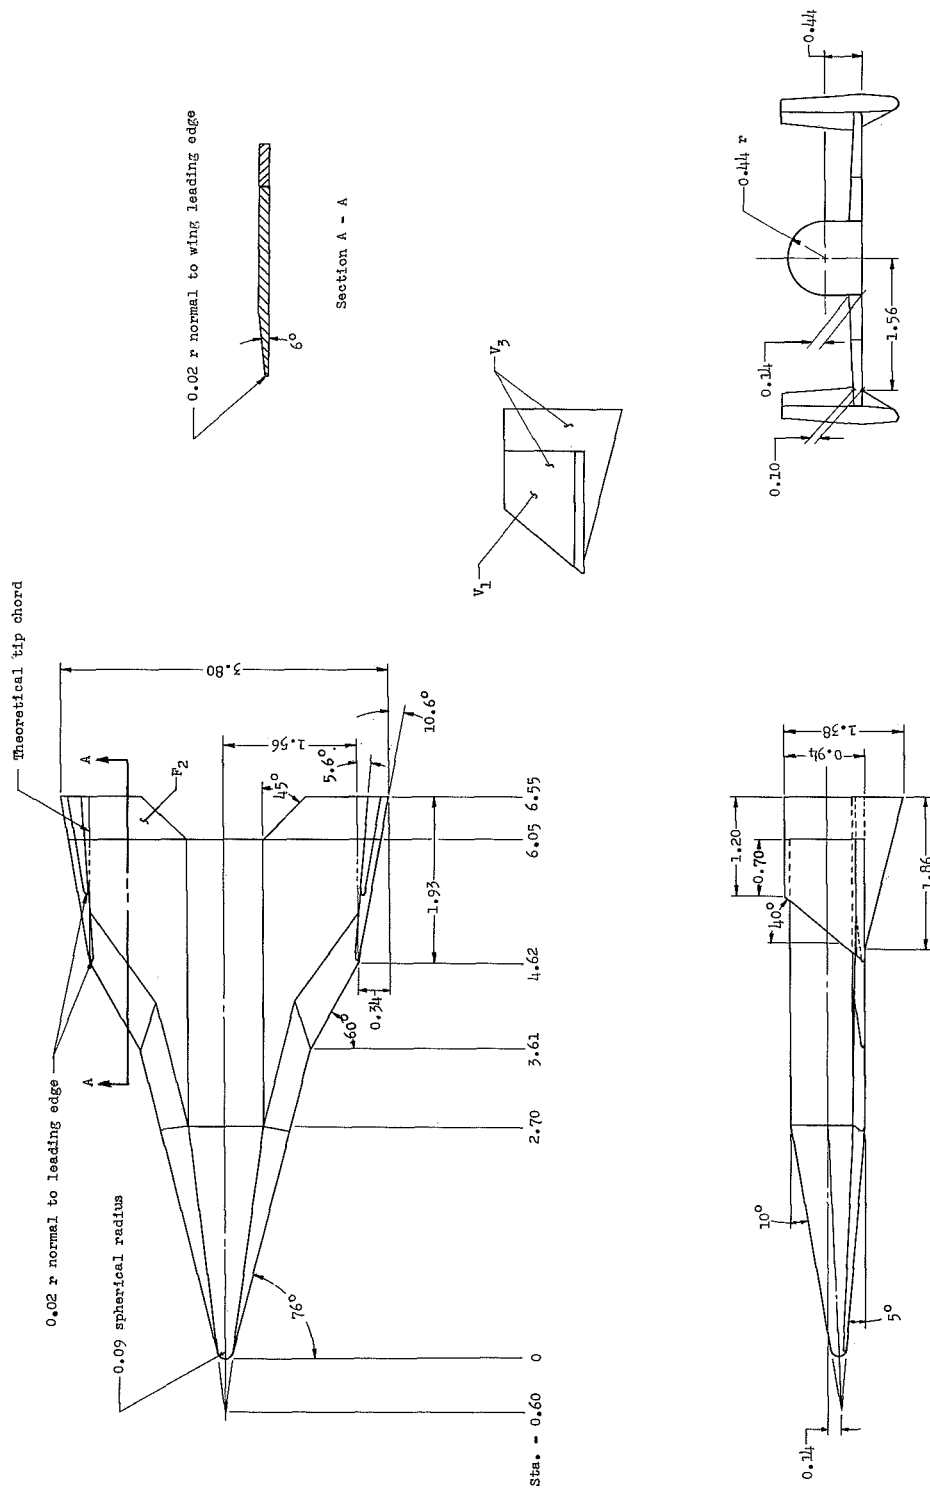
Drawings of model B1W4V3F2. All dimensions are in inches unless otherwise indicated.
